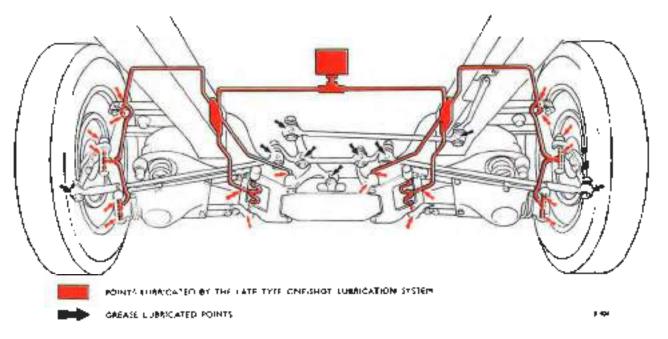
flate type one-shot oil lubrication system and grouse lubricated steering joints.
